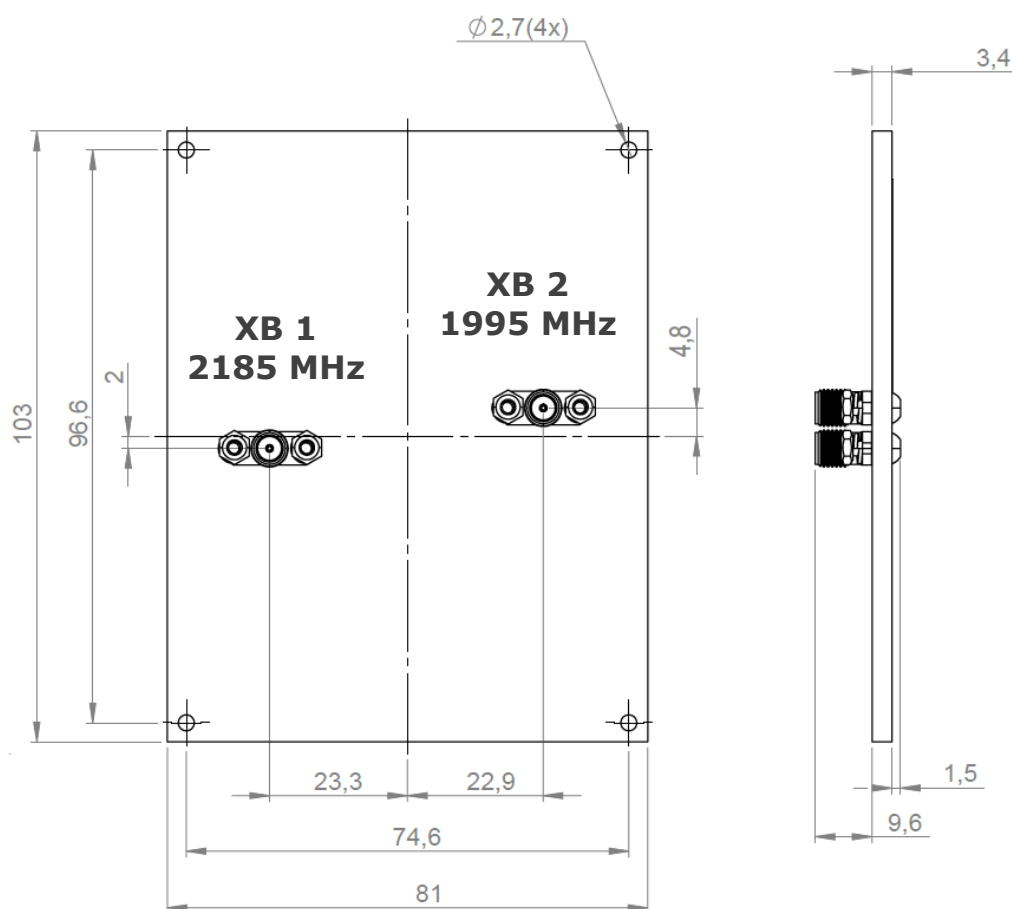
Mechanical dimensions and positions of RF connector SMA(f), all dimensions in mm
